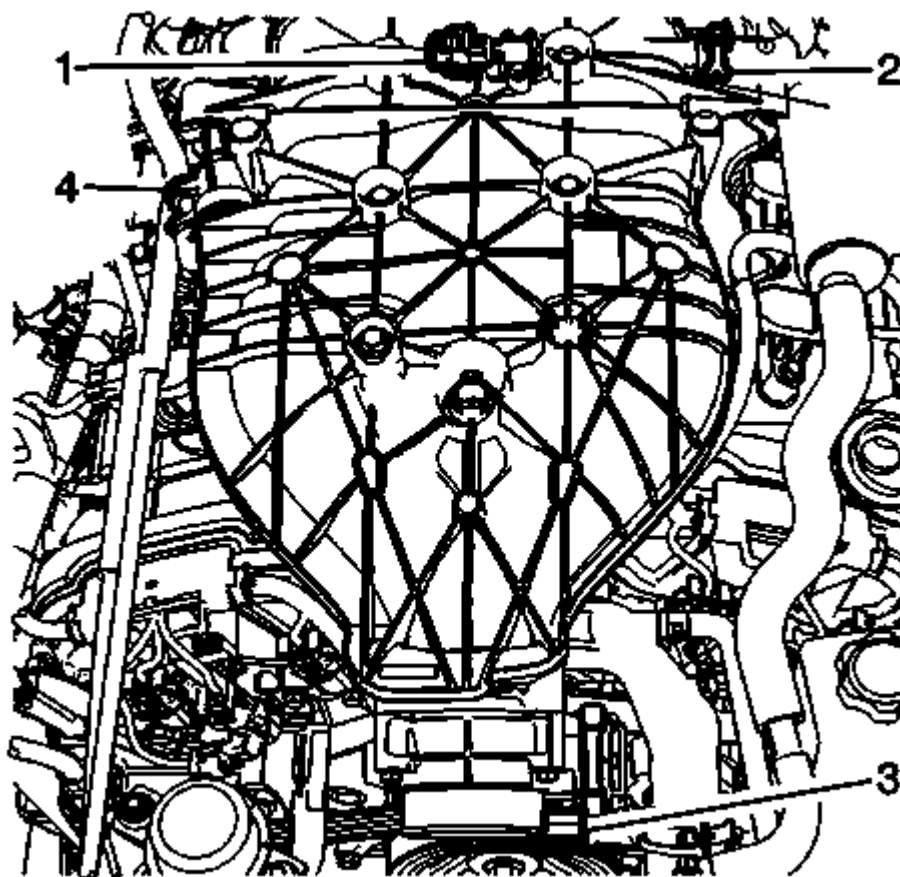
Map Sensor Connector, Brake Booster Vacuum Hose, Throttle Body Electrical Connector & Purge Solenoid
